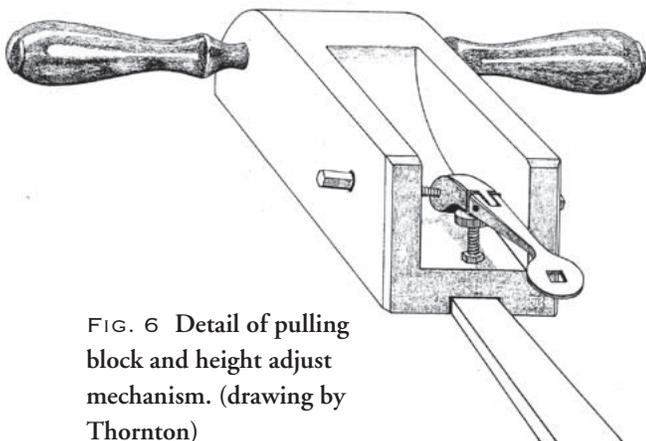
Detail of pulling block and height adjust mechanism. (drawing by Thornton)
